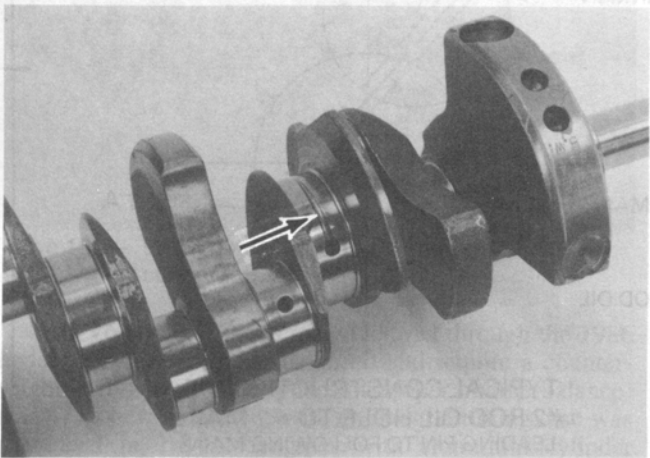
Late-model V6/60 crankshafts have lead-in grooves in main bearing journals to channel oil to rod bearing oil feed holes.
